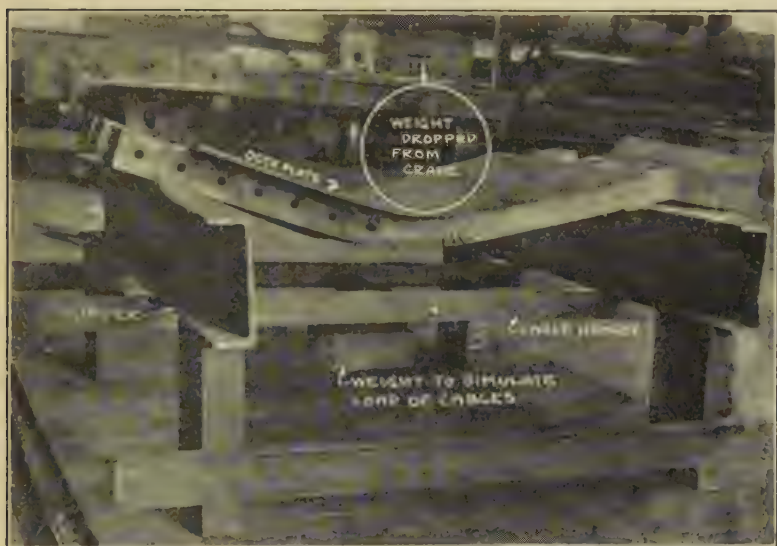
Shock test of a welded ship's deck and cable hangers.
